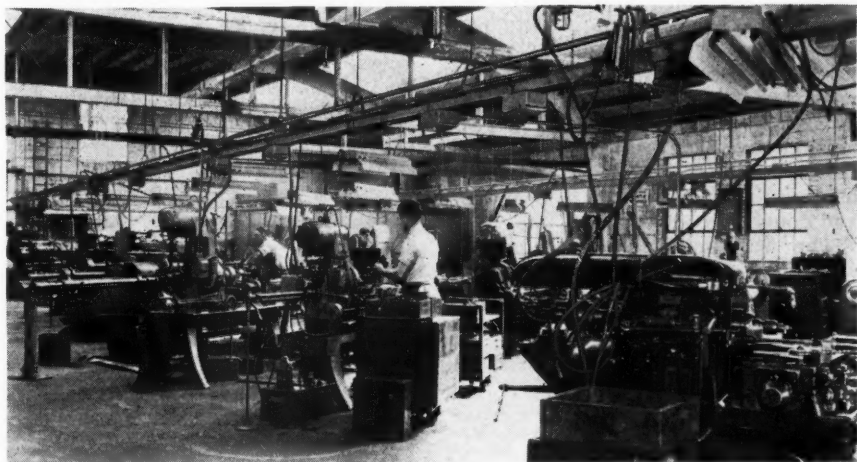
Interior of San Diego Machine Company shop, showing arrangement of equipment. Note particularly the duct extending over the machines, carrying air, light and power lines. Contacts can be made at any 12-inch point along the line.
